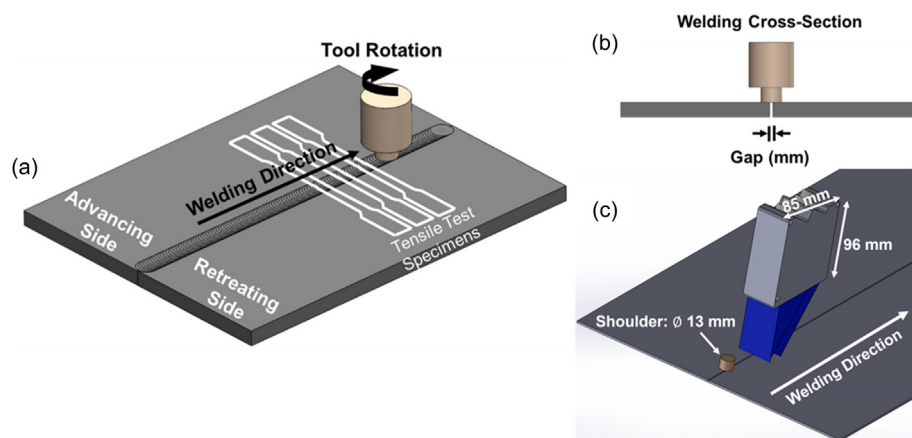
Schematic illustration of the (a) welding configuration, (b) welding cross-section, and (c) laser positioning, with the blue surface indicating the laser.
